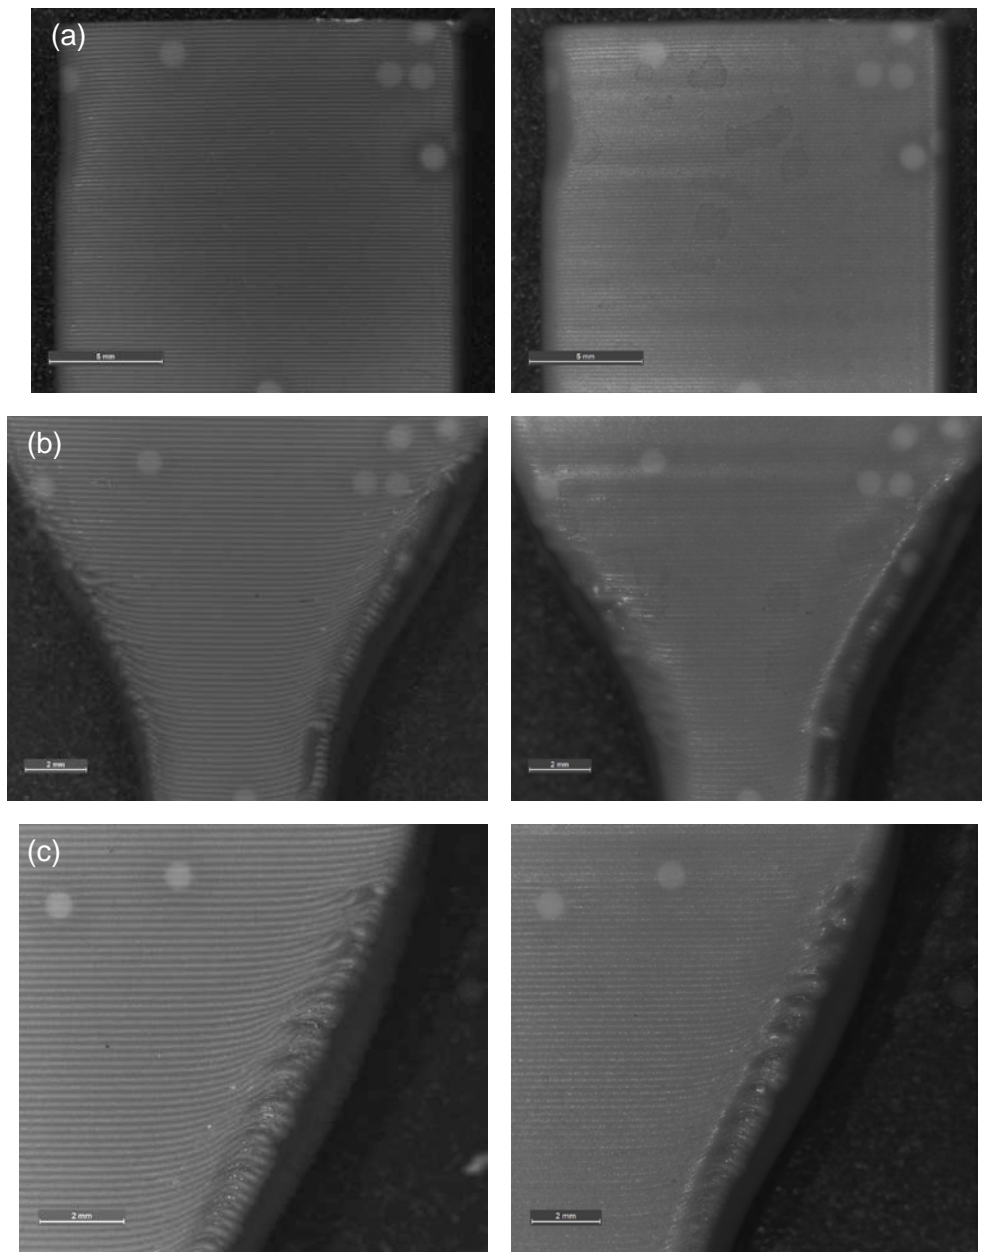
BATCH 5 (A) GRIPPING SECTION (B) NECK (C) EDGE OF GRIPPING SECTION
